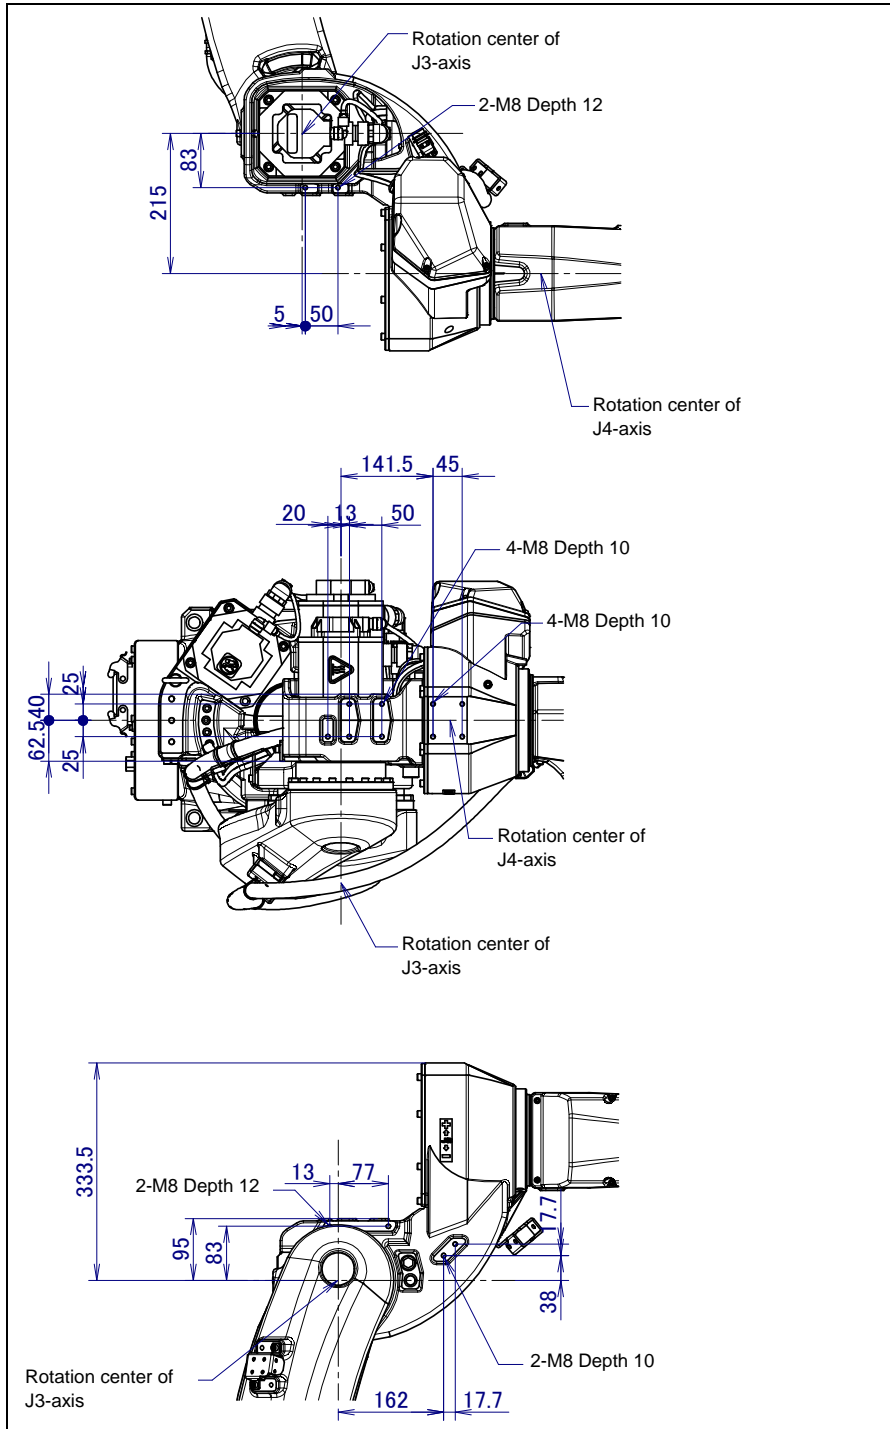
(b) Equipment mounting faces (1/2) (A+B+C part)
